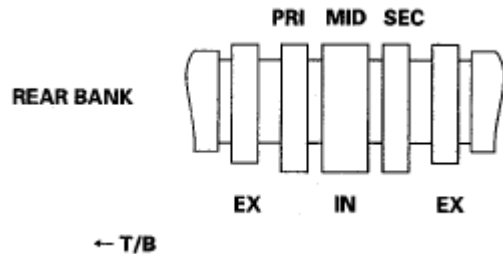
Identifying Cam Lobe Positions - Rear Bank
